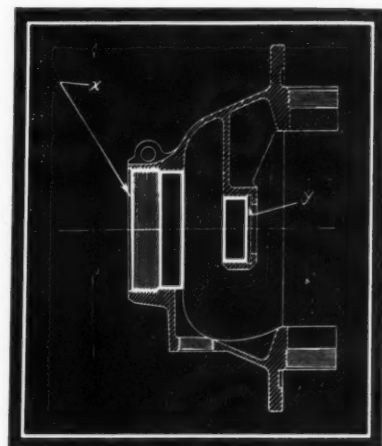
In planetary miller the cutter spindle is carried in a pair of adjustable eccentric sleeves
